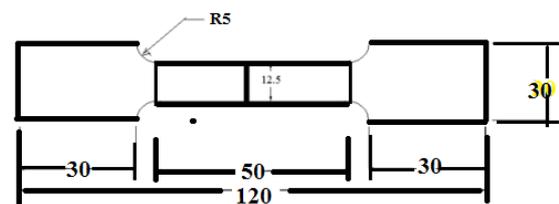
Tensile test diagram for gas metal arc welding as per ASTM [12].
